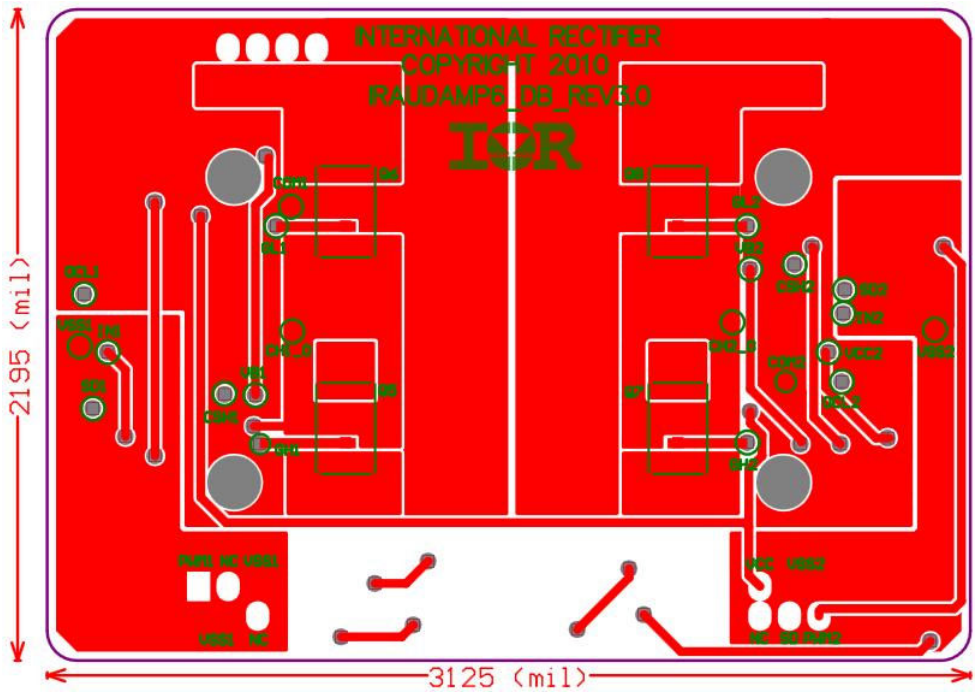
IRAUDAMP6 Daughter board PCB Top Overlay (Top View)
